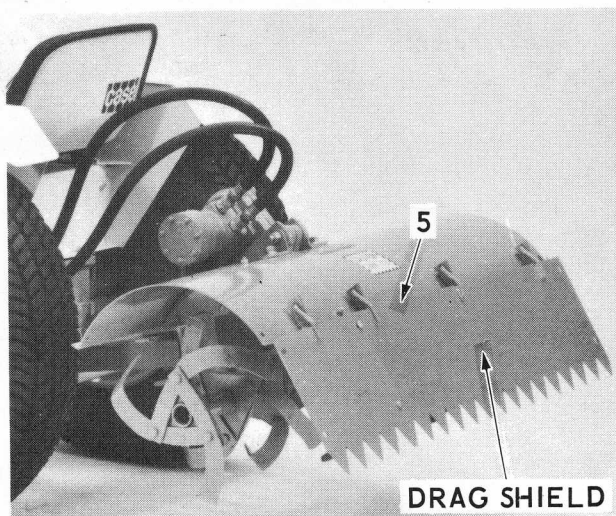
Tiller Assembled to Sleeve Hitch and Hydraulic PTO Kit
